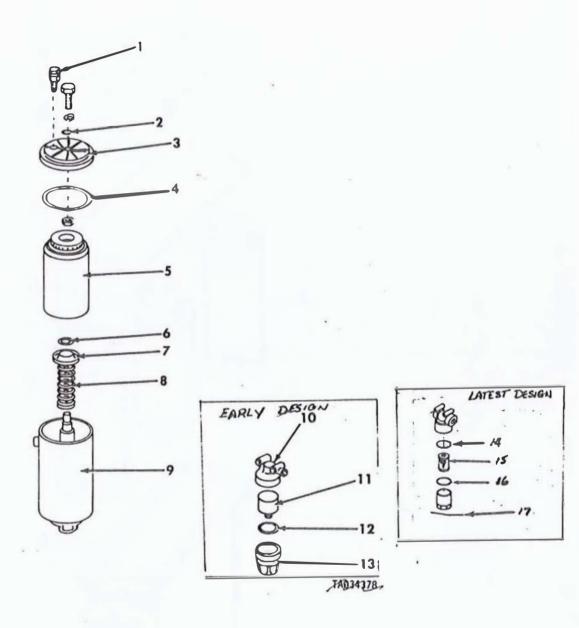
Primary fuel filter and manifold heater fuel filter assemblies.
